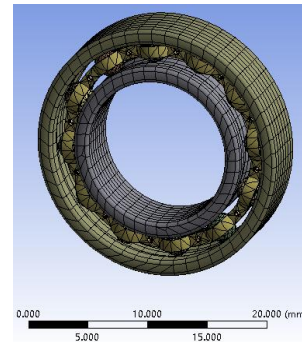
Solid Model of SKF6180 Deep Groove Ball Bearing
